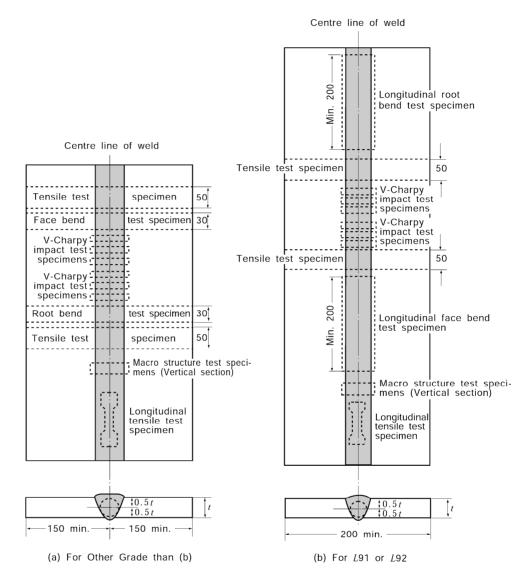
Butt Weld Test Assembly with One-run and Multi-run Technique (Unit: mm, t= Plate thickness)
